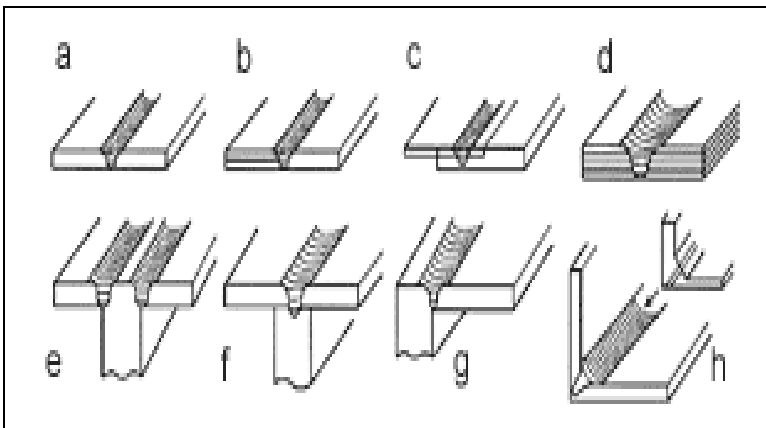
Joint geometry's suited to Friction Stir Welding.
